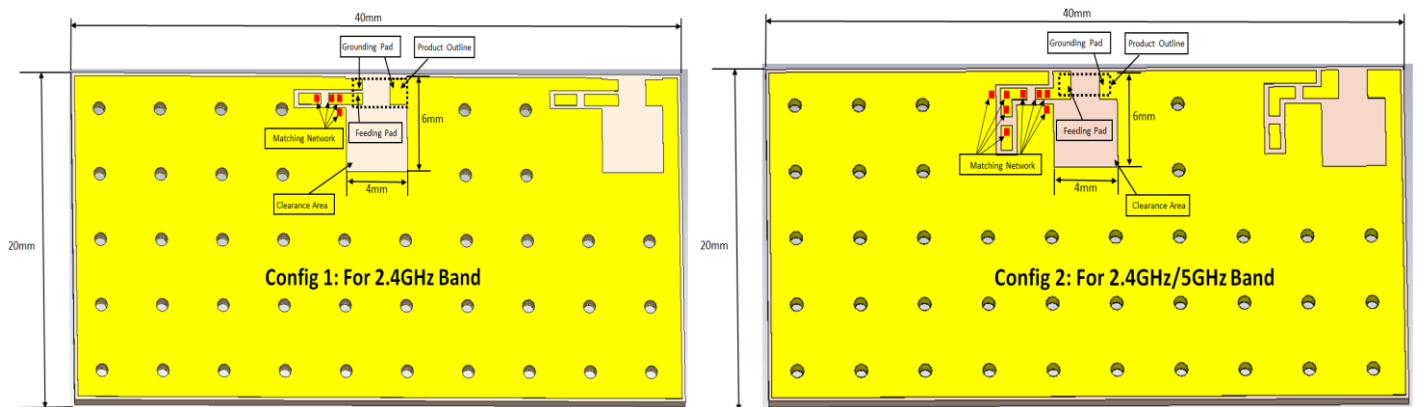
REFERENCE PCB LAYOUT FOR TWO CONFIGS
